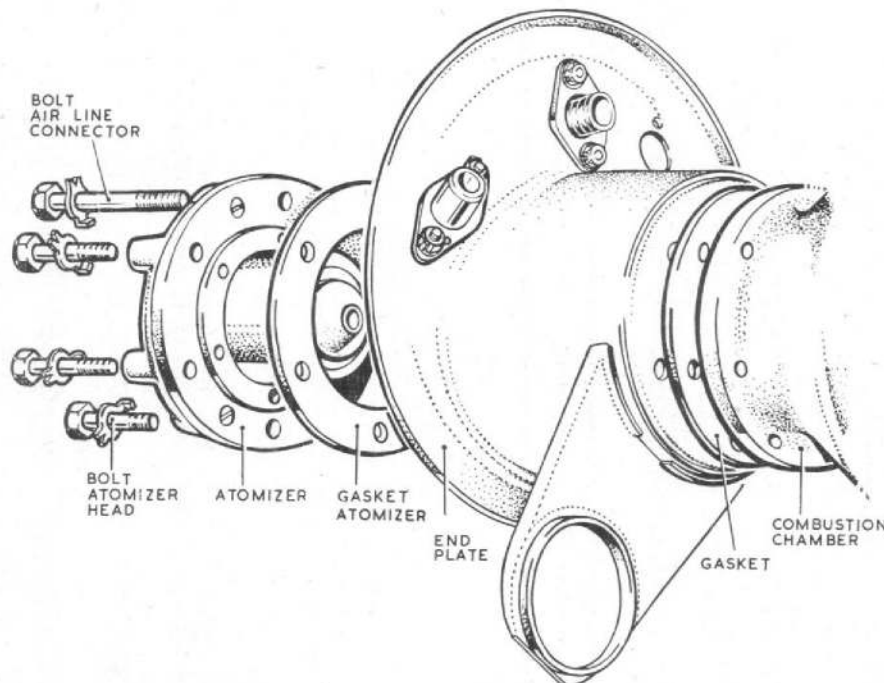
End plate, atomizer and combustion chamber (forward entry type head)
